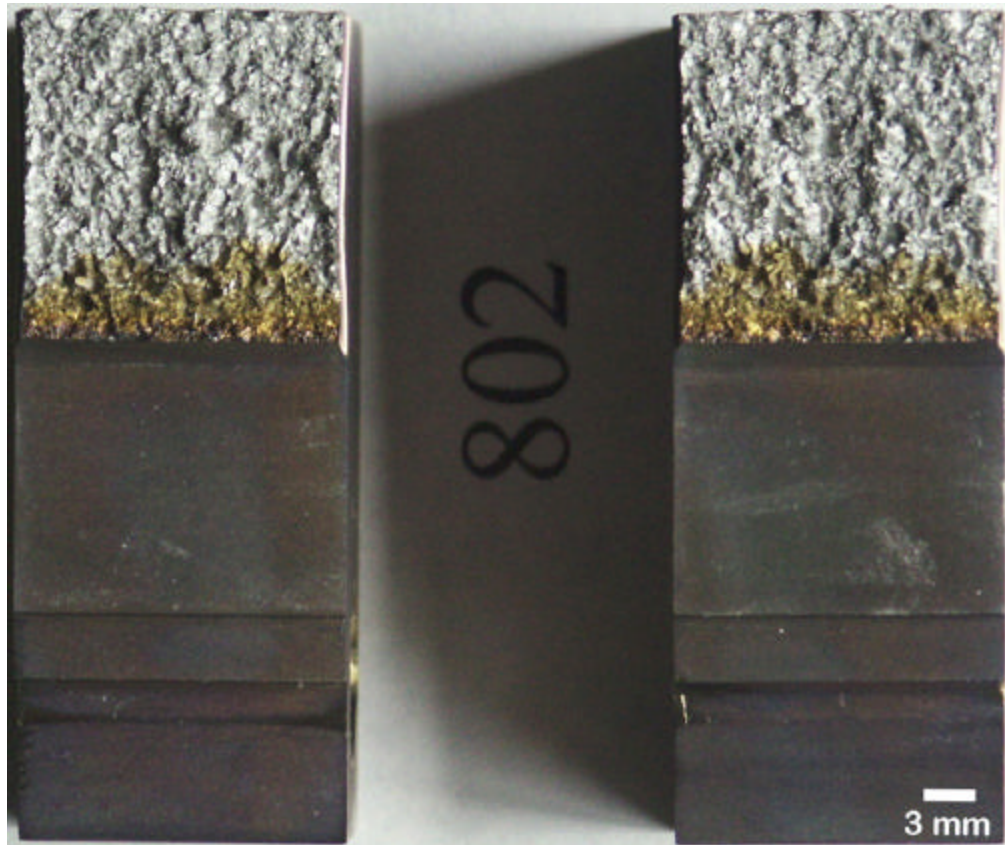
Typical compact tension specimen fracture surfaces from Ti5111 base metal.
